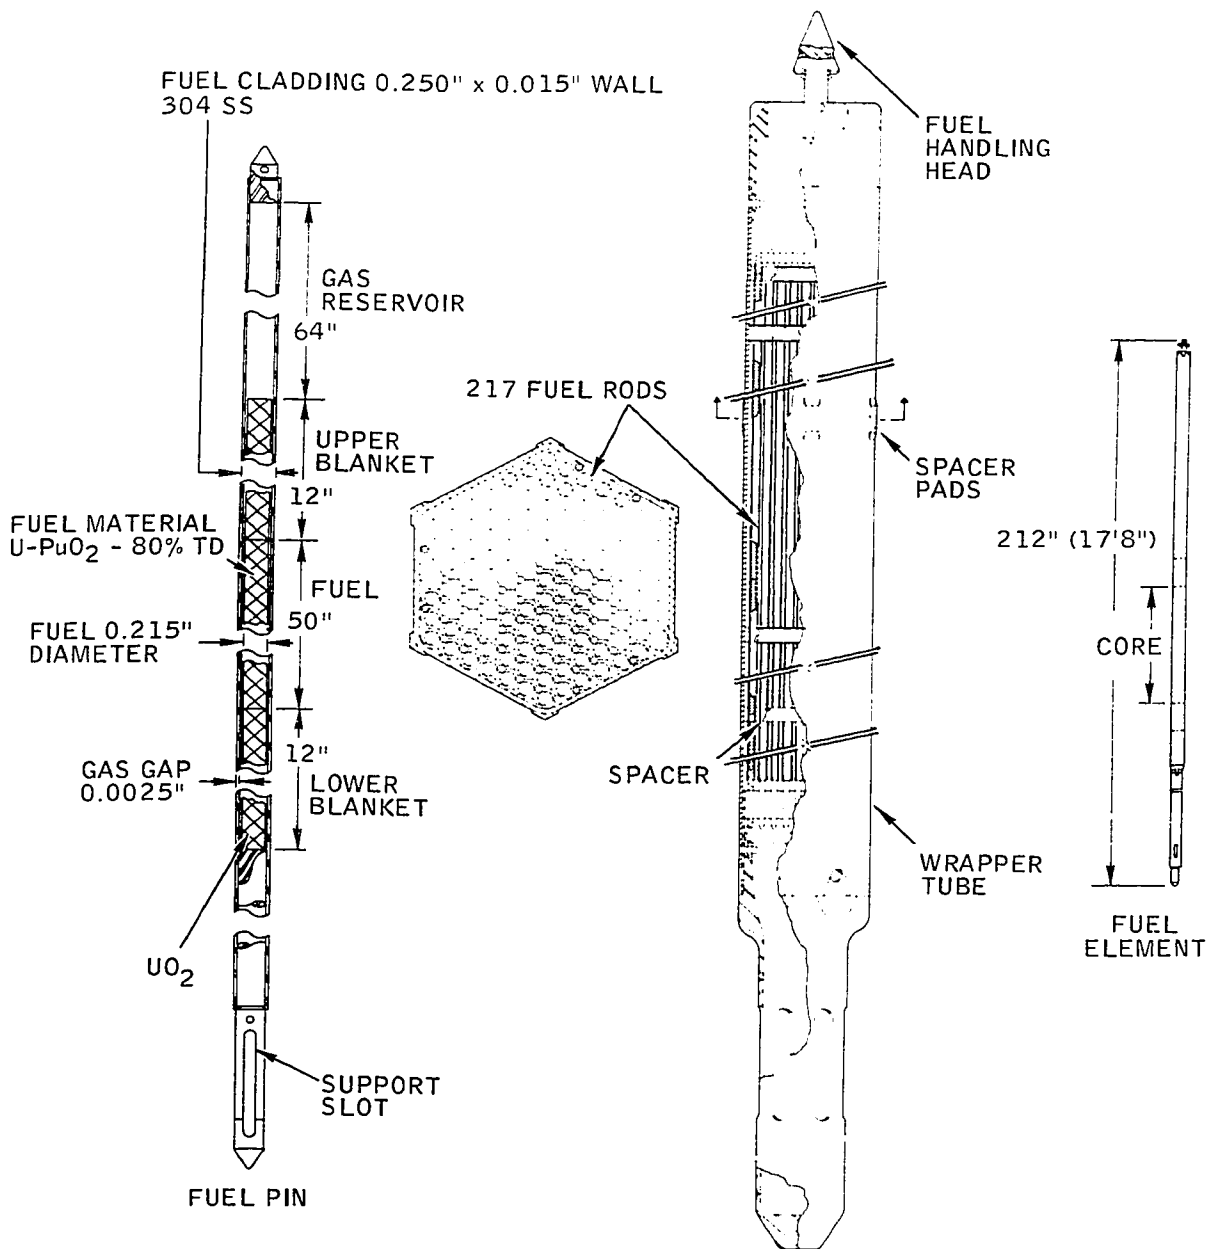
Typical LMFBR Fuel Pin and Element Design (after AI-68-Memo-37, Vol. I)
